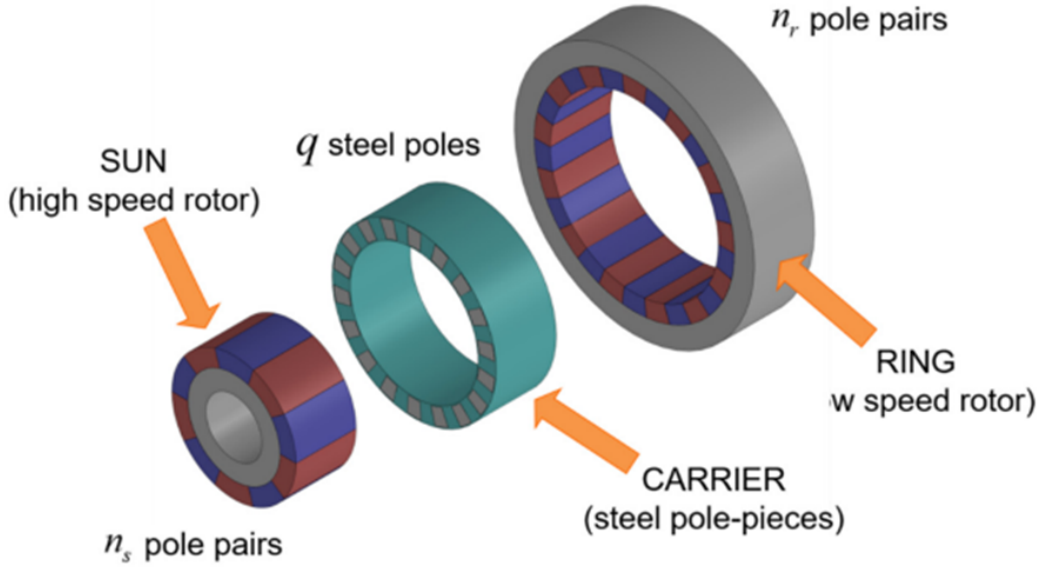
Exploded view of a Planetary Magnetic Gearbox with Sun, Carrier and Ring gears. [9]
